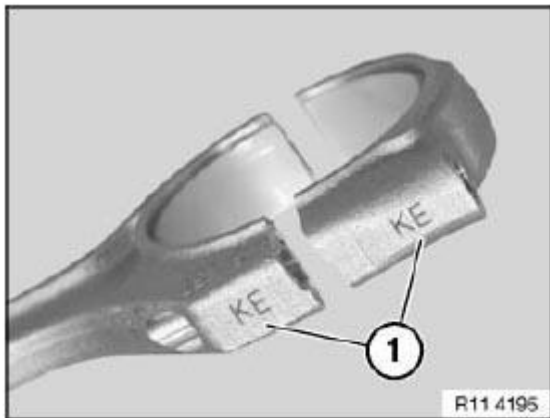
Identifying Connecting Rod And Connecting Rod Bearing Cap Mark
